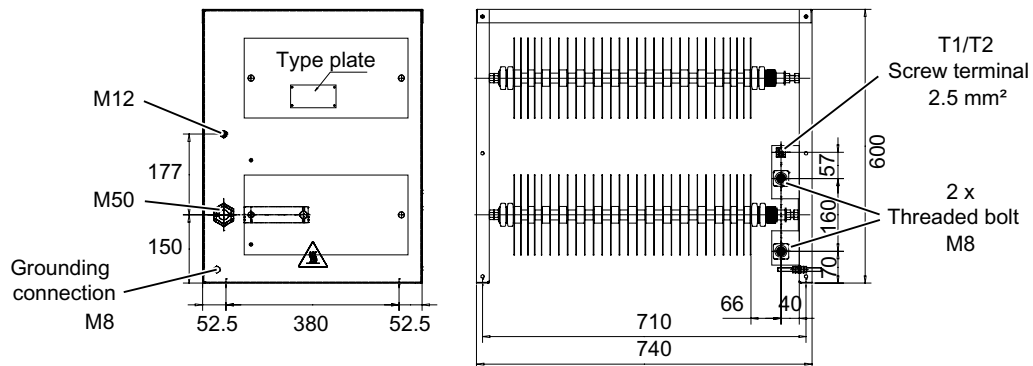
Dimension drawing braking resistor 25 kW/125 kW
